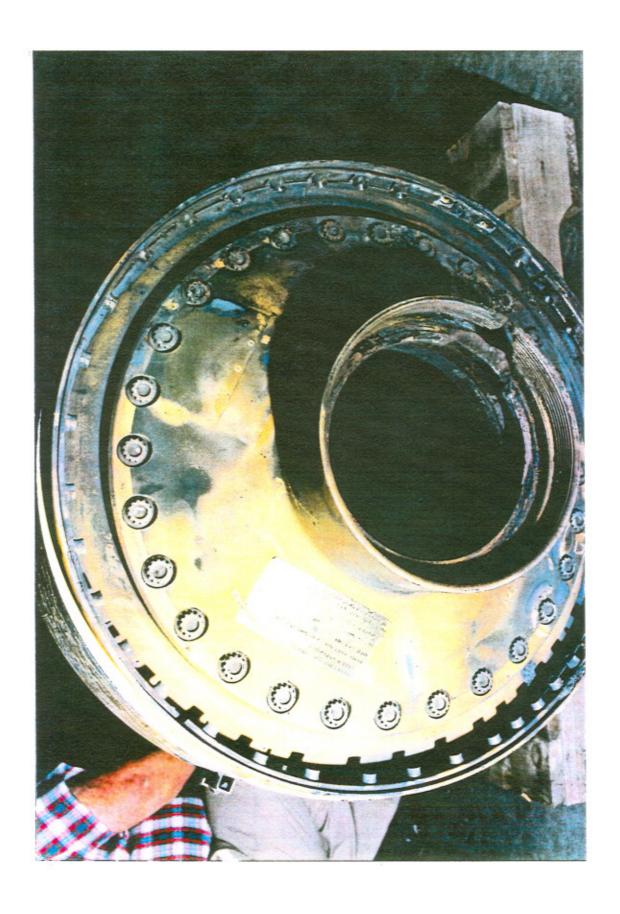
Solid Rock Motor Without Exit Cone Nozzle
